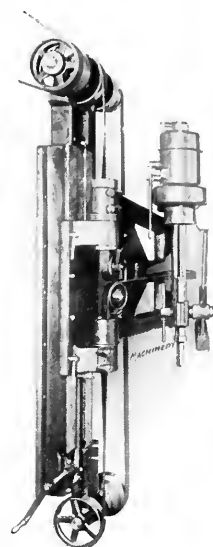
Machine shown in Fig. 1 with Arm Closed
